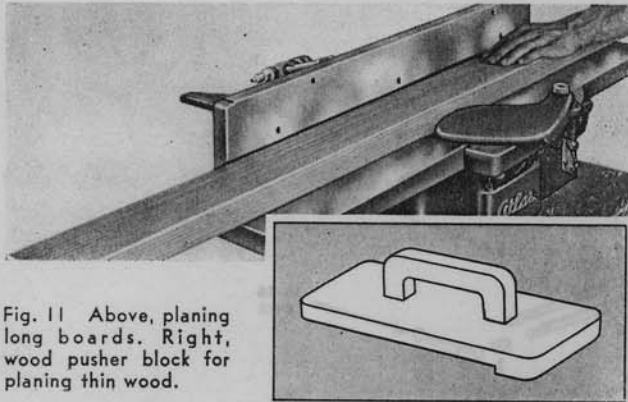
Above, planing long boards. Right, wood pusher block for planing thin wood.
